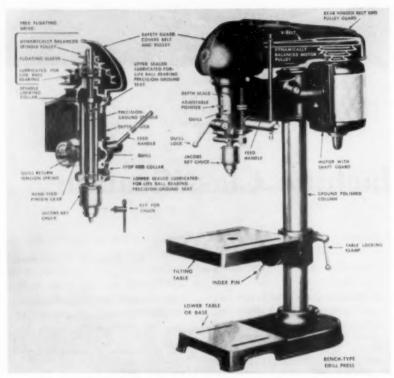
The distinguishing feature of this sensitive 17-inch benchmounted drill press is the hand feed. Made by Delta Power Tool Div., Rockwell Mfg. Co.
